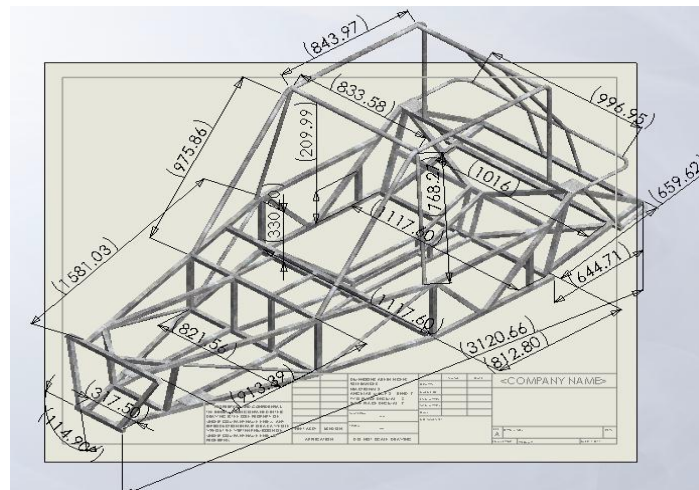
Frame Design and Dimensions in SolidWorks 2012
